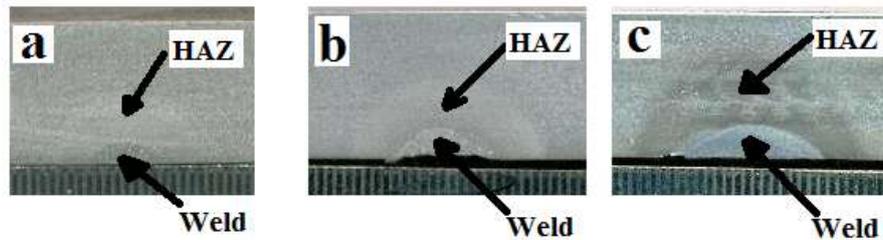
Macrostructure zones of TIG weld pool geometries
